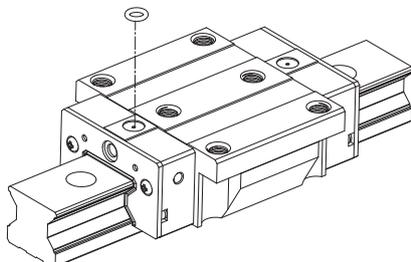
A4 – Ball type mouthpiece 6 mm
